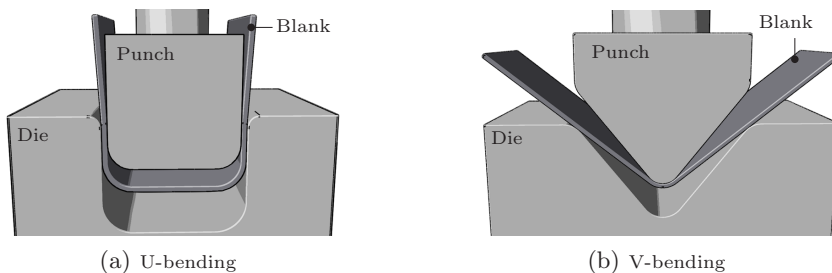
Commonly used experimental techniques for studying the springback in sheet metals.
